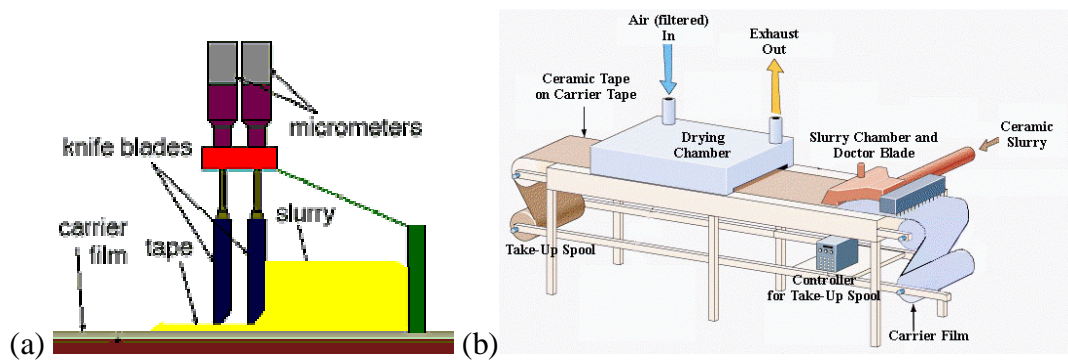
Schematic of (a) the casting process where the slurry is pulled under the doctor blade and (b) the entire tape caster including the drying chamber and carrier film take-up roll.
